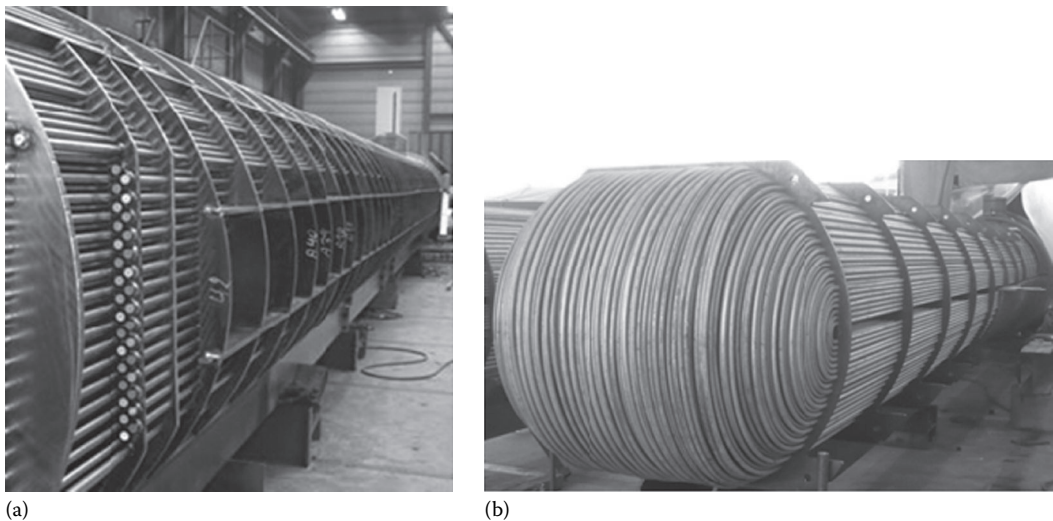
Shell and tube heat exchanger tube bundle assembly. (a) Straight tube bundle (Courtesy of Vermeer Eemhaven B.V., Rotterdam, the Netherlands) and (b) U-tube bundle. (Courtesy of Holtec International, Marlton, NJ.)
